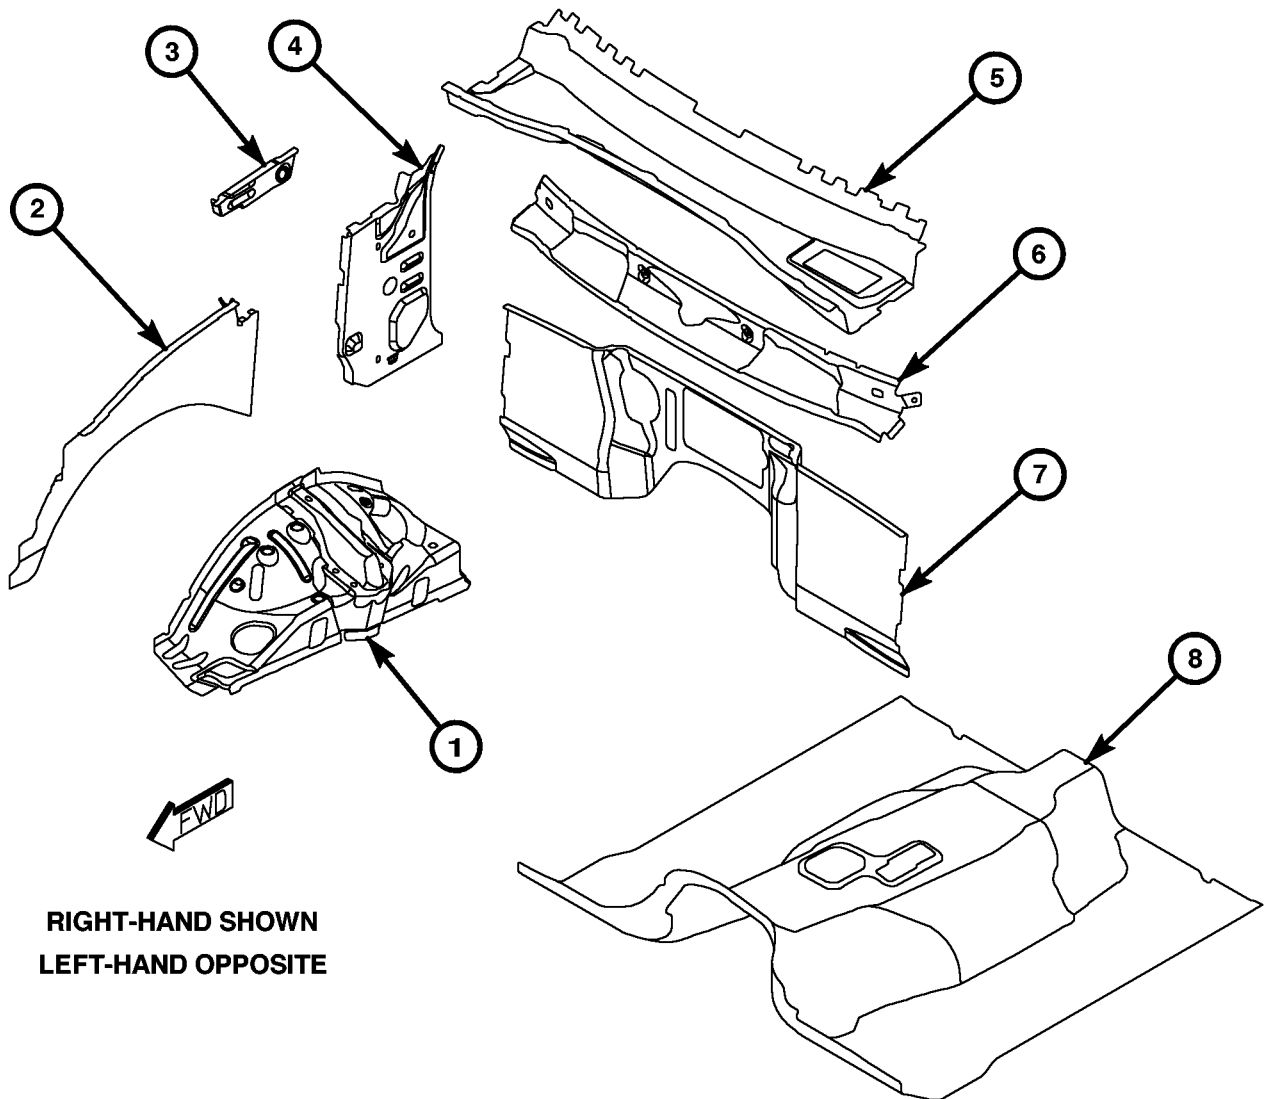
DASH PANEL/WHEELHOUSE ASSEMBLY
